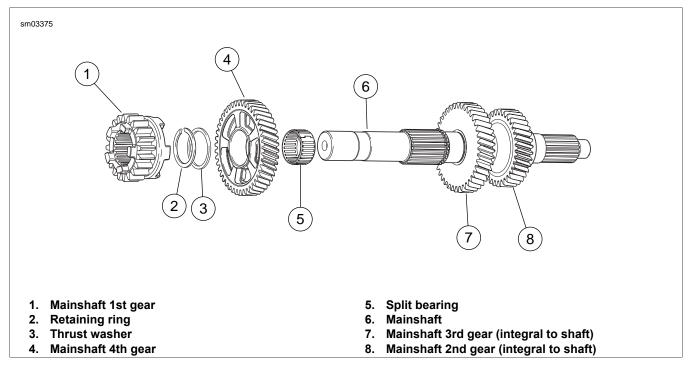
Transmission Mainshaft Assembly Once Removed from Left Crankcase/Disassembly
